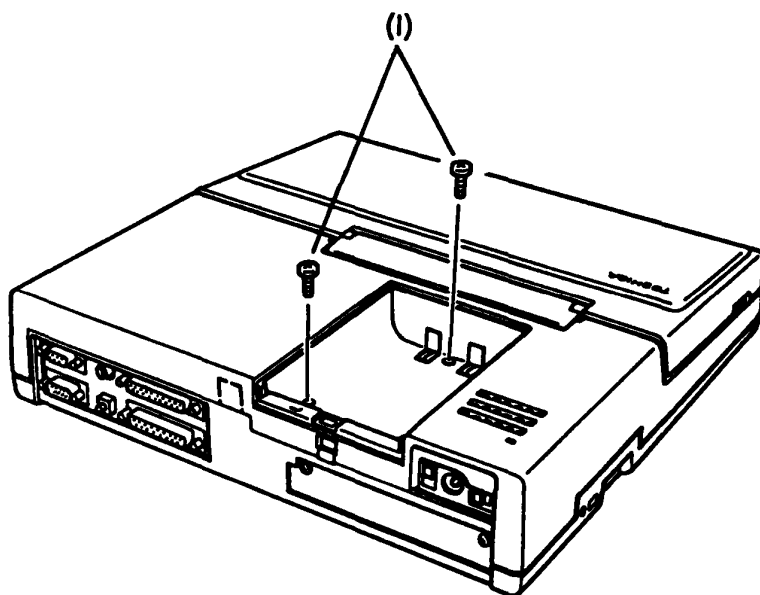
Removing the Screws from the Top Cover Assembly
